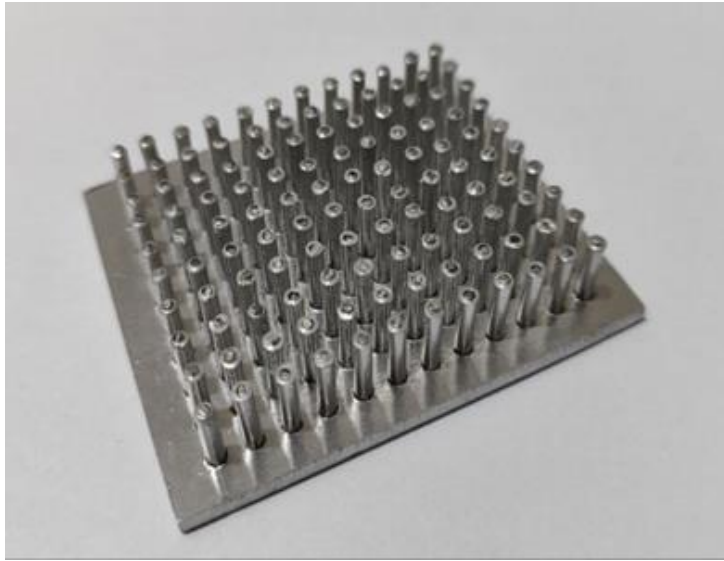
shows the type of heat sink In Line with Dimensions (mm)
